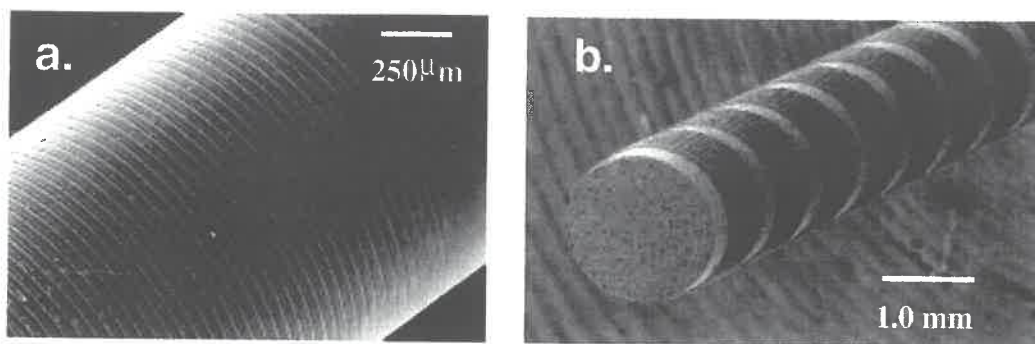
Cylindrical workpieces machined with FIB-fabricated microtools. Helical grooves are machined into (a.) PMMA, (b.) MacorTM
